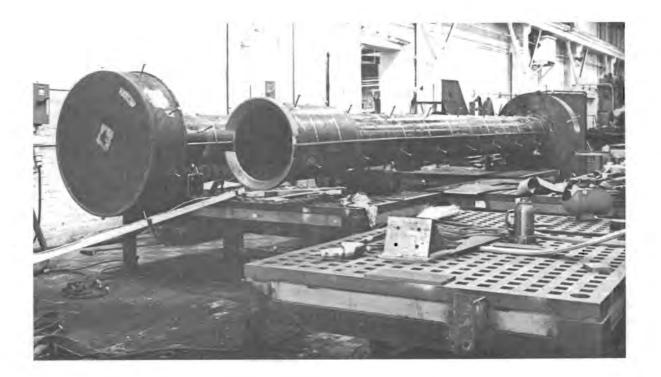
Concrete Silo Liners Prior to Shipping
